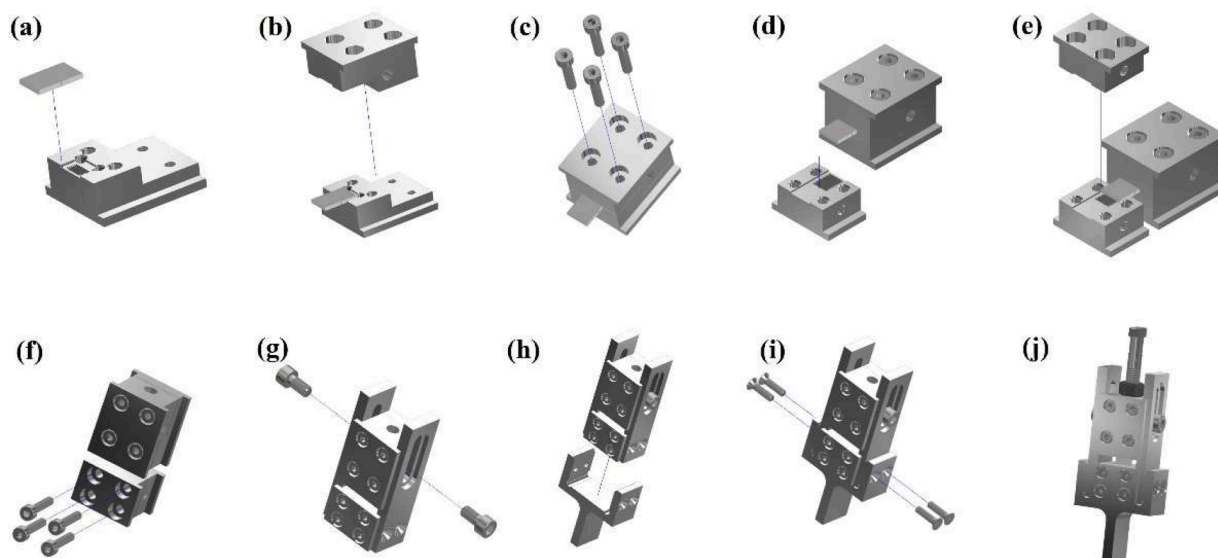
Assembly sequence illustration of the designed sample fixture in the tensile mode.
